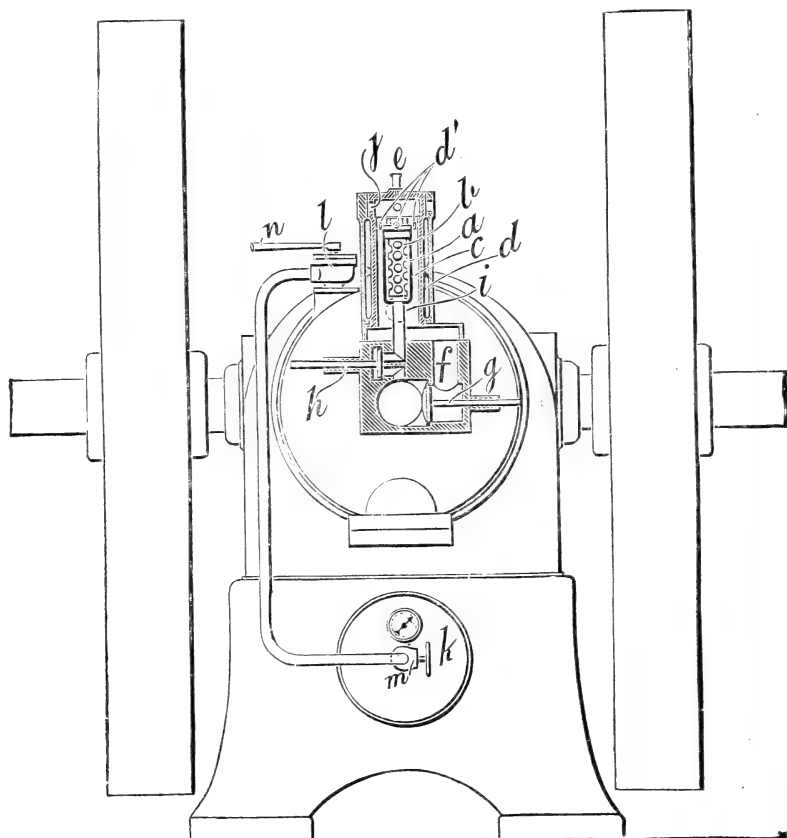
THE BLACKSTONE OIL ENGINE.—DIAGRAM END VIEW.
